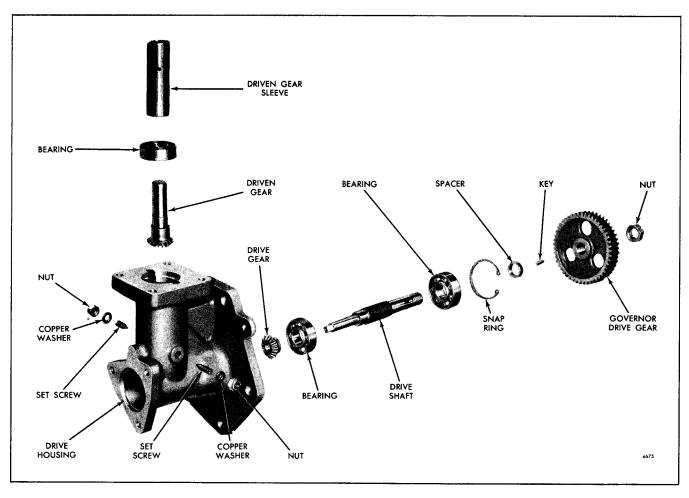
Hydraulic Governor Drive Details and Relative Location of Parts
